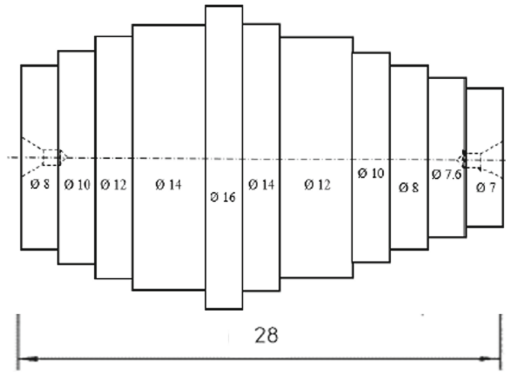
Thermal test-piece. A cycle corresponding to the thermal test-piece runs on the machine but without any machining because tools are replaced by pneumatic probes.
